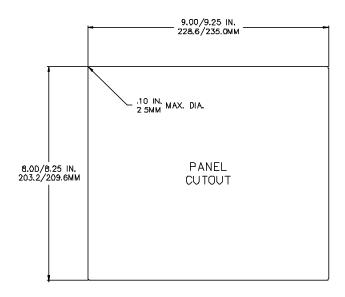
560 and 562 Panel Mount Cut-Out
